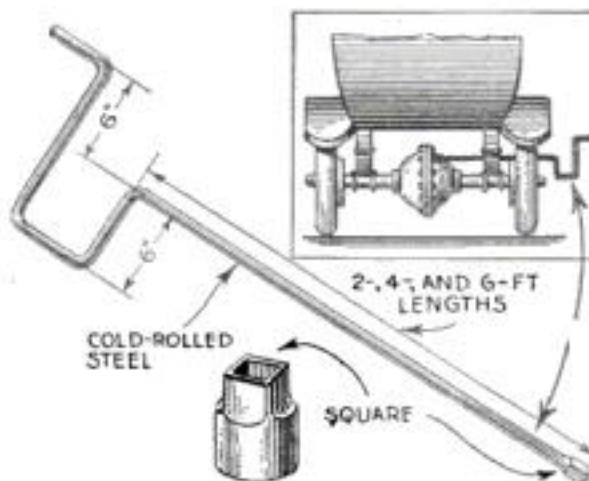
Long handles for socket wrenches are useful in turning inaccessible bolts
